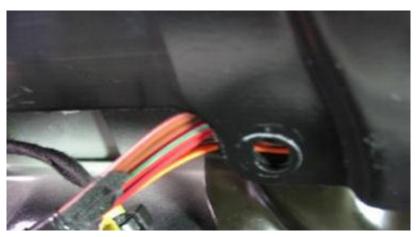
Closer view of wires that fell out of the sunroof frame groove and would become pinched between the sunroof frame and mounting bracket. Mounting bolt removed for demonstration purposes.
